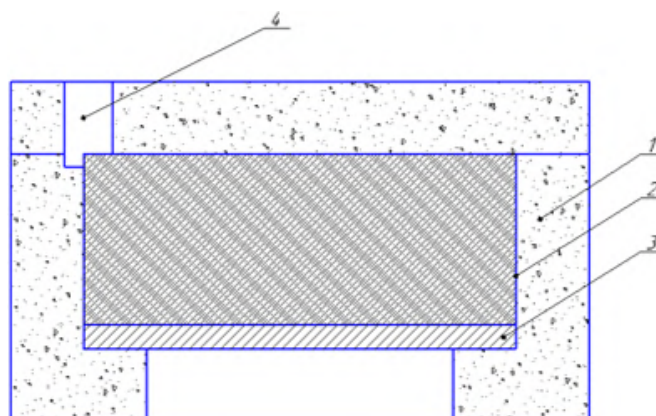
Mould-reactor with an open metal base in the lower part: 1 – moulding mixture; 2 – thermite charge; 3 – metal base; 4 – hole for ignition of thermite charge and gas discharge.
